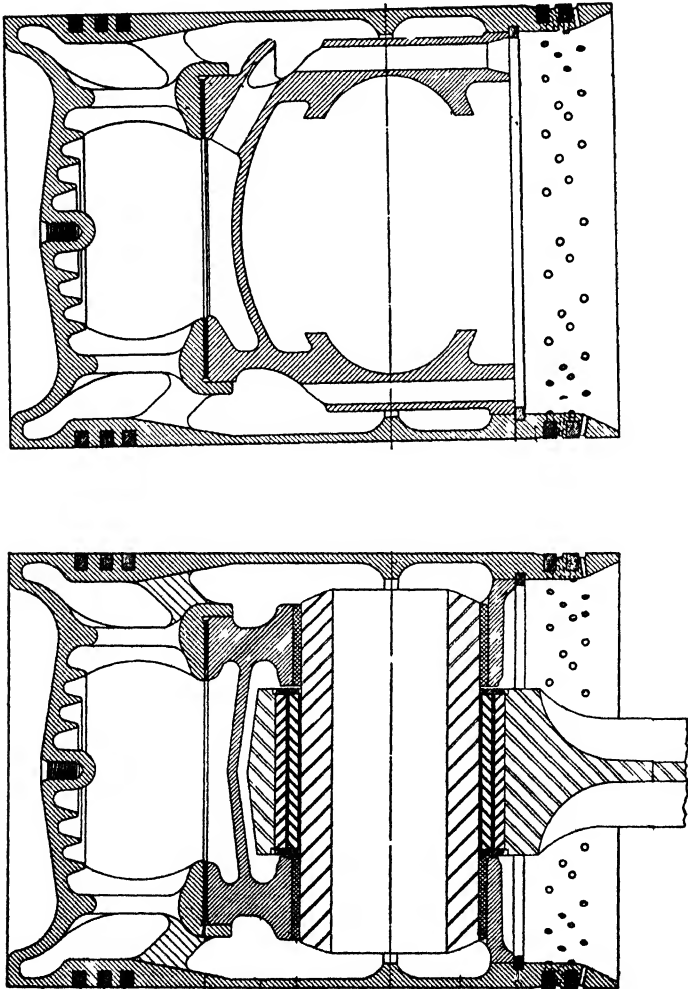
TWO SECTIONAL VIEWS OF THE TWO-PART PISTON
